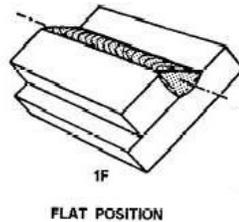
American Welding Society 1F (Flat-Horizontal) position.
